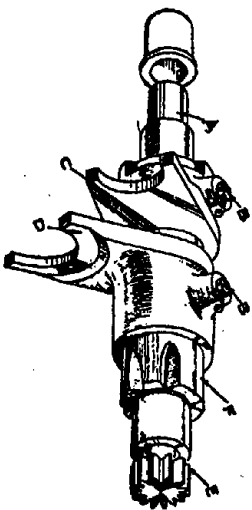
GEARBOX CAMSHAFT AND SELECTOR FORKS.
